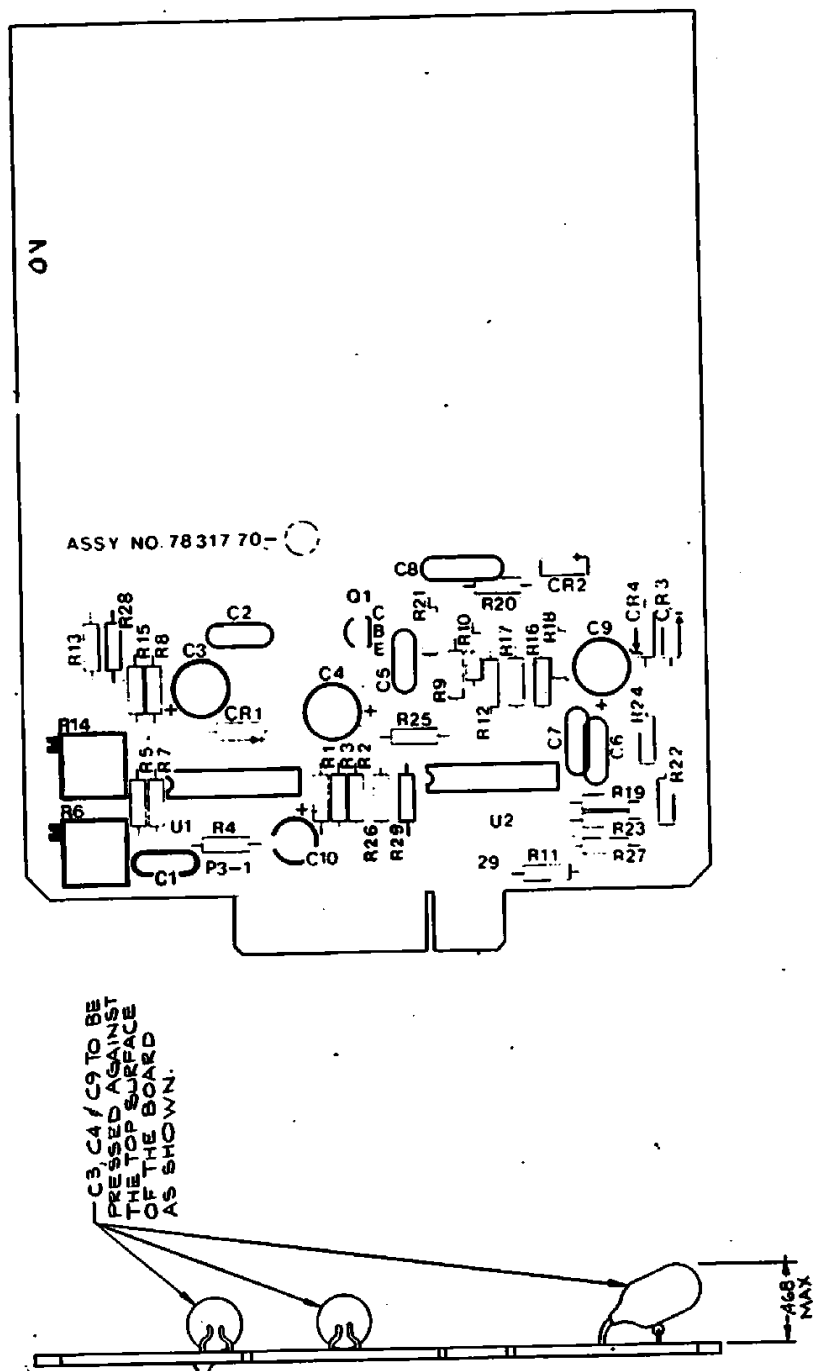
CONTROLLER CONTROL BOARD PCB3, PARTS LOCATION DIAGRAM
